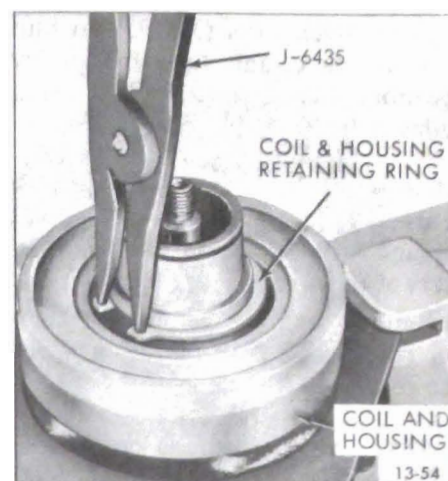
Removing or Installing Coil and Housing Retainer Ring
